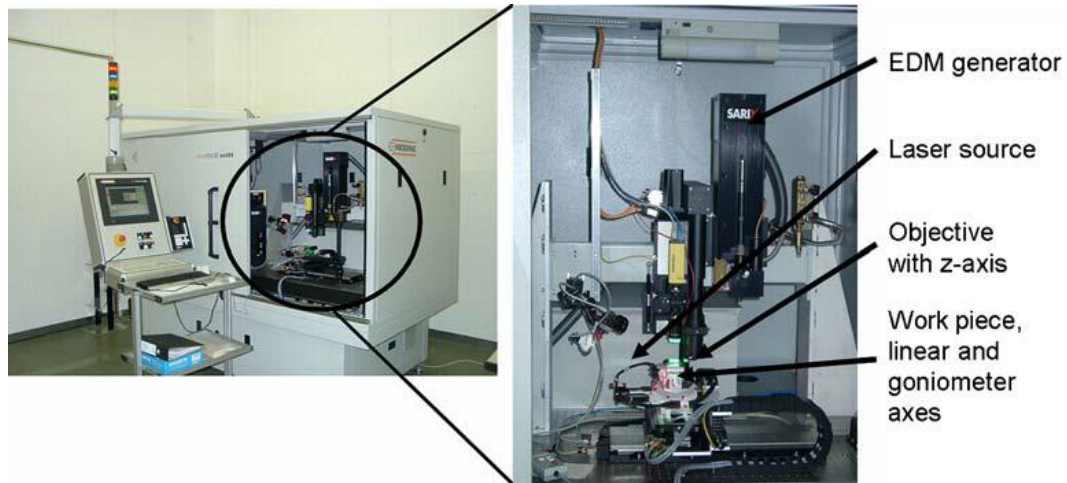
Machine tool to perform sequential EDM/Laser ablation [17]
